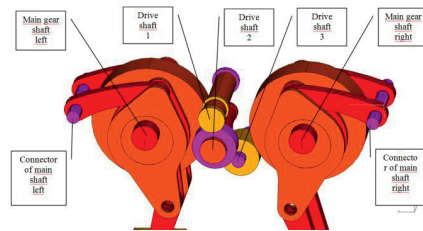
Kinematic model of stamping eccentric press drive, components - kinematic pairs
